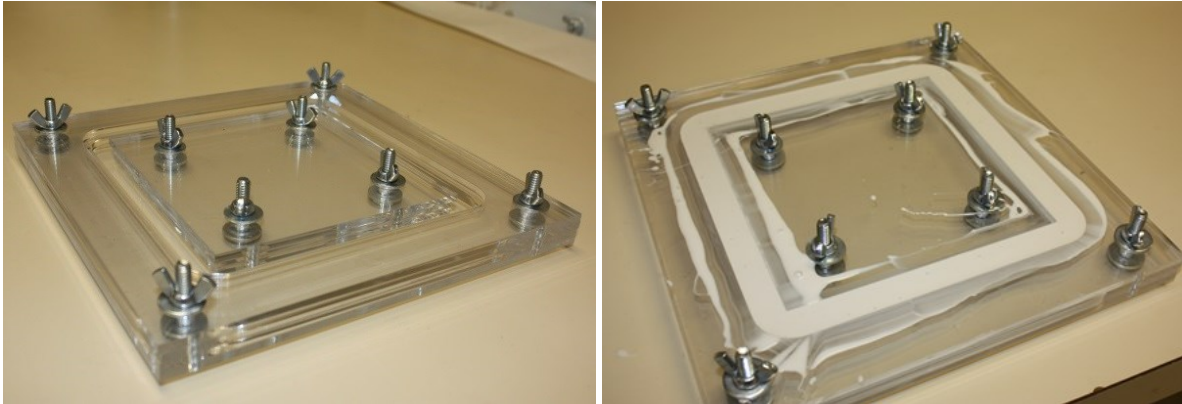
Stirrup form mold before (left) and during (right) silicone casting
